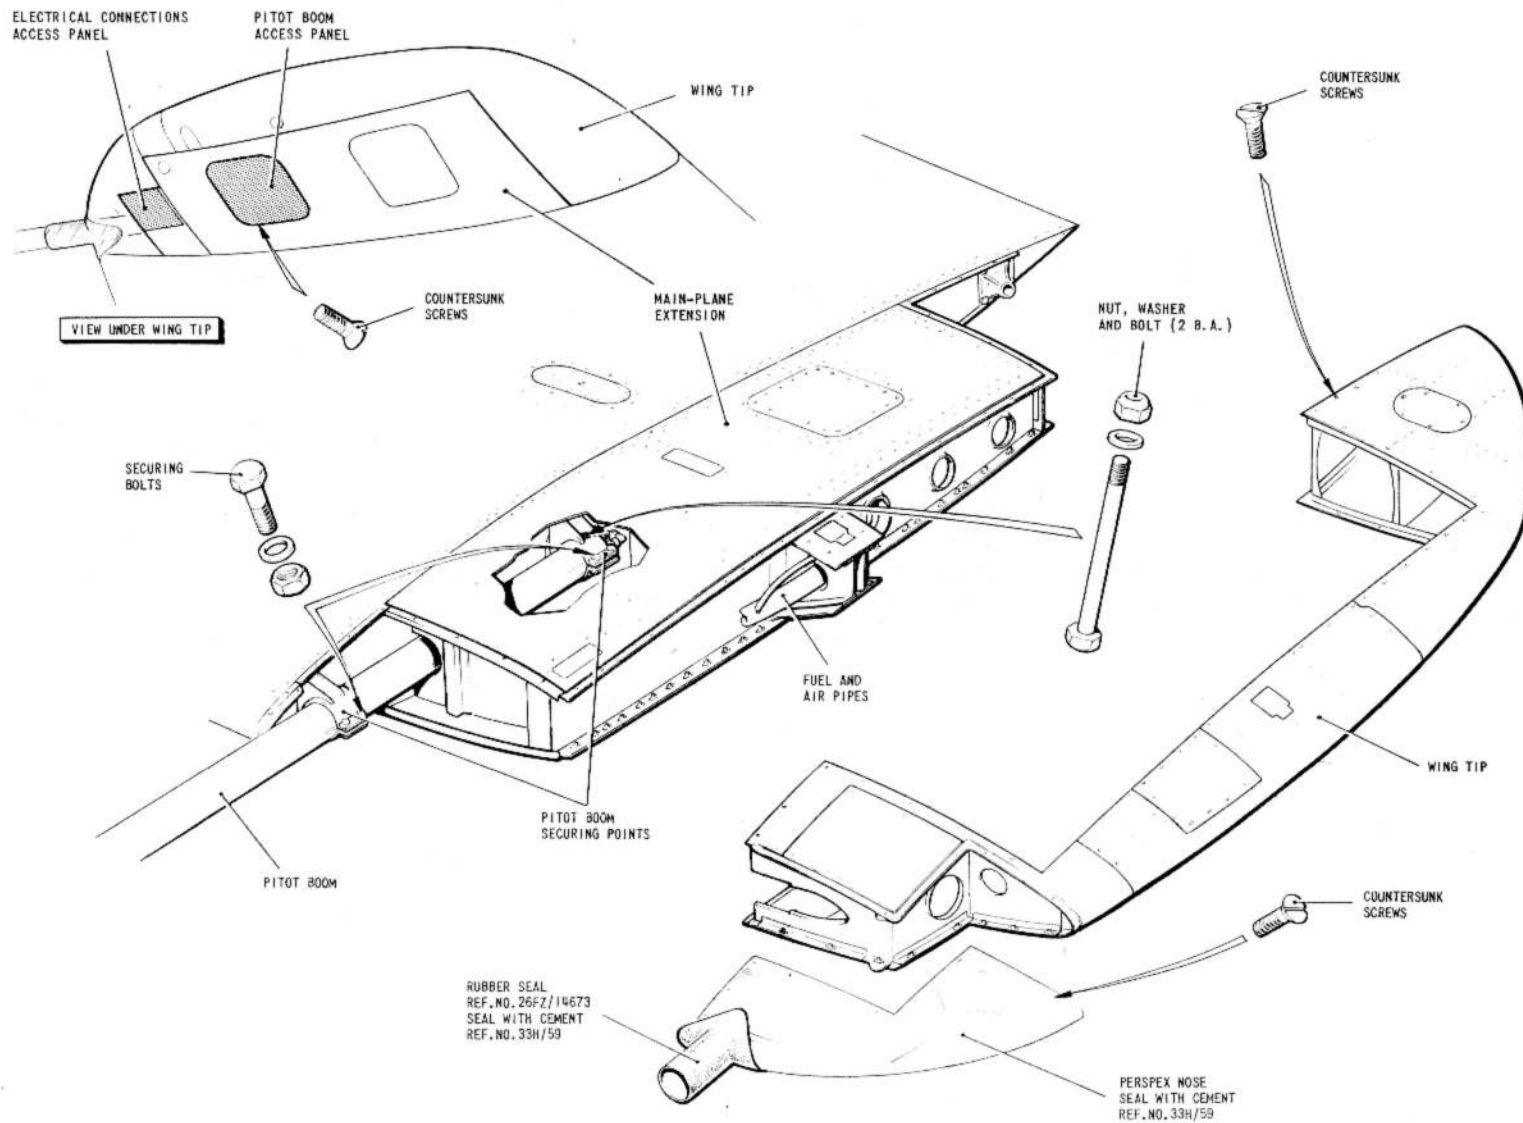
WING TIP / PITOT BOOM - REMOVAL AND ASSEMBLY
